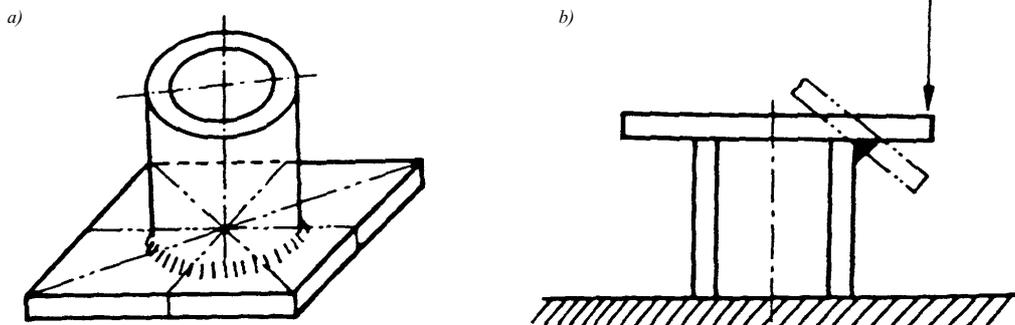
Diagram of cutting-out (a) and fracture (b) testing of test specimens from pipe T-joint P₄ test pieces
